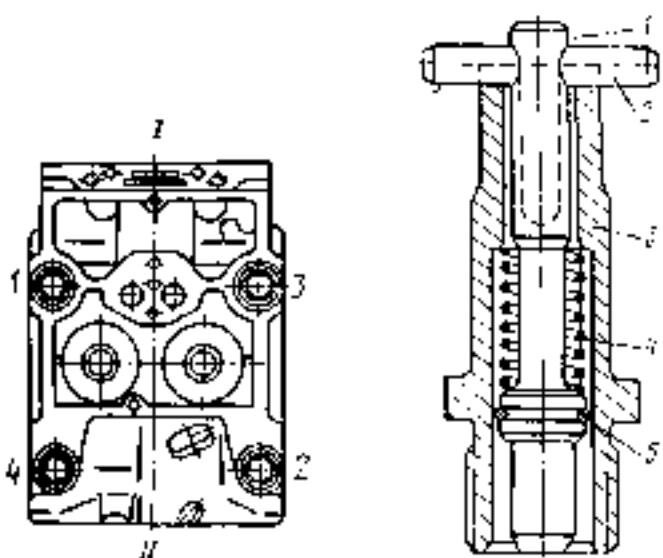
Pattern of Tungsten Carbide Balls on Cylinder Head:
